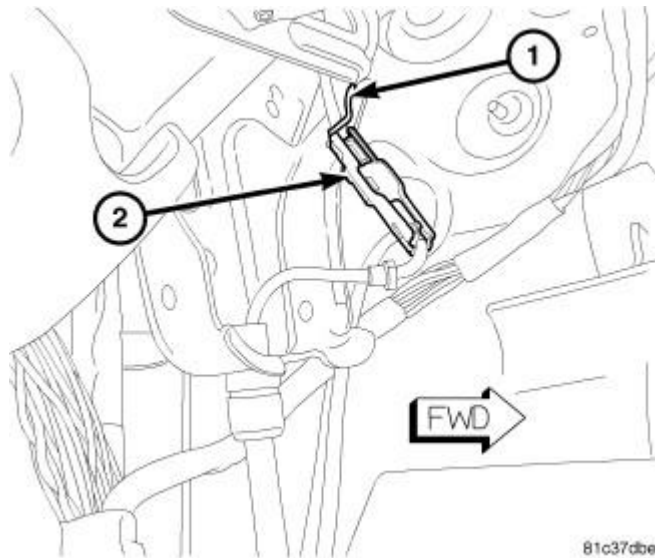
CABLE CONNECTOR SECURED IN FORK
